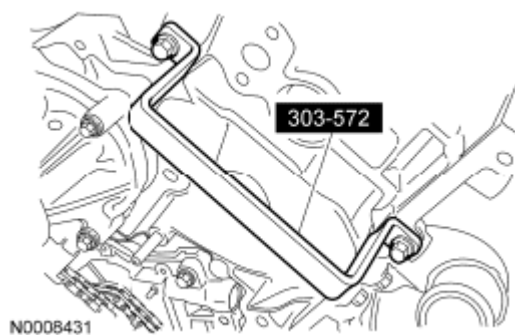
Identifying Cylinder Head Remover/Installer Onto LH Cylinder Head
